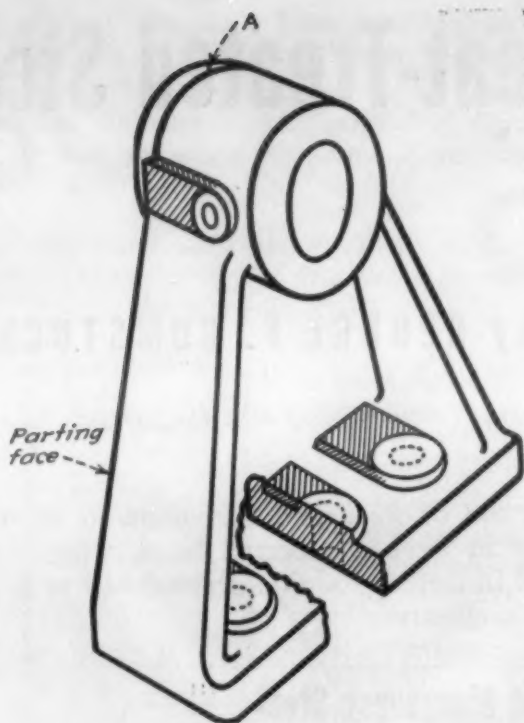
Casting with bosses which, if left circular, requires loose pieces on the main pattern, entailing additional pattern cost for loose sections and higher molding cost. If sections between bosses and parting face are filled in, the boss section can be solid with the pattern, making for ease in molding. The parting line is shown at A. Wide variation in section thickness is unfavorable and might be avoided, especially if castings were cored out on underface, although this might increase cost.
